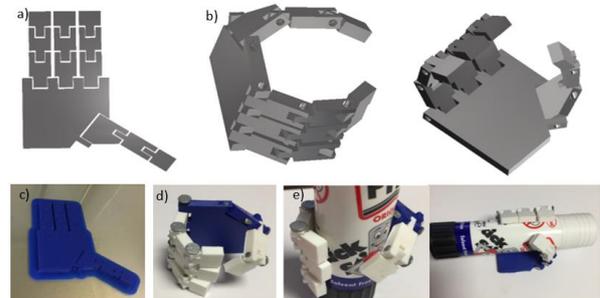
a) Mini Hand a) CAD flat b) CAD posed for grip c) hand on print bed d) assembled hand e) demonstration of grip.
